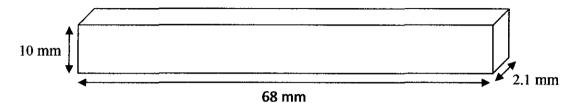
Dimensional of Composite and Thermosetting for Flexural Test based on ASTM D 790M
